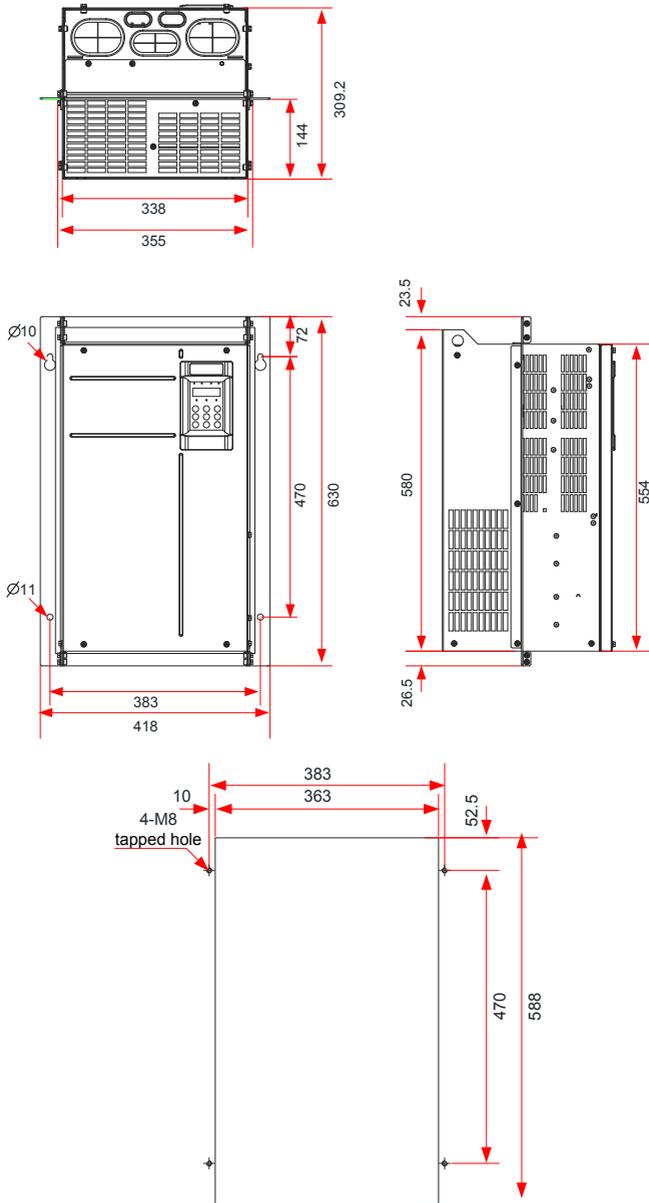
Intermediate mounting bracket dimensions and hole spacing for 75-110 kW AC drive models
